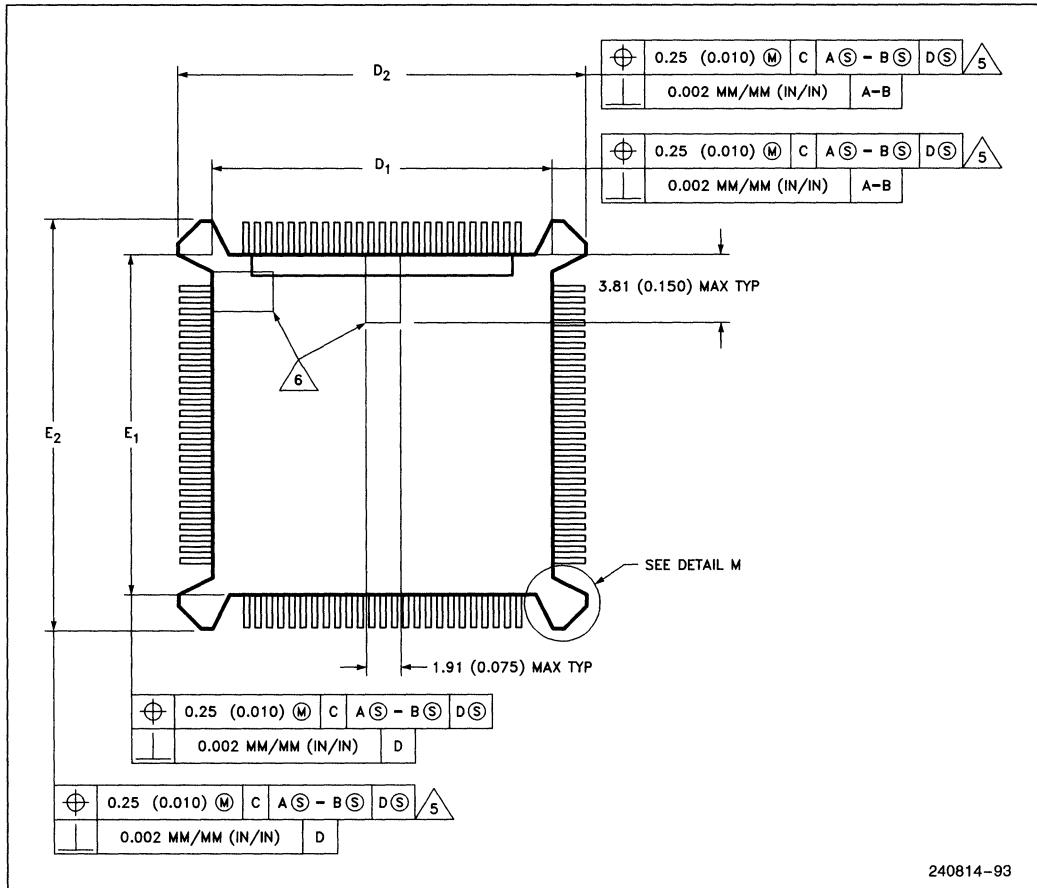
Detailed Dimensions of the 82360SL I/O in the 196-Lead PQFP—Molded Details
